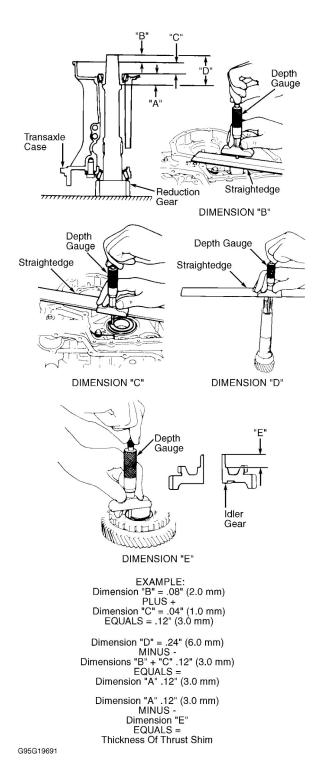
Measuring Reduction Gear Bearing Preload Courtesy of NISSAN MOTOR CO., U. S. A.
